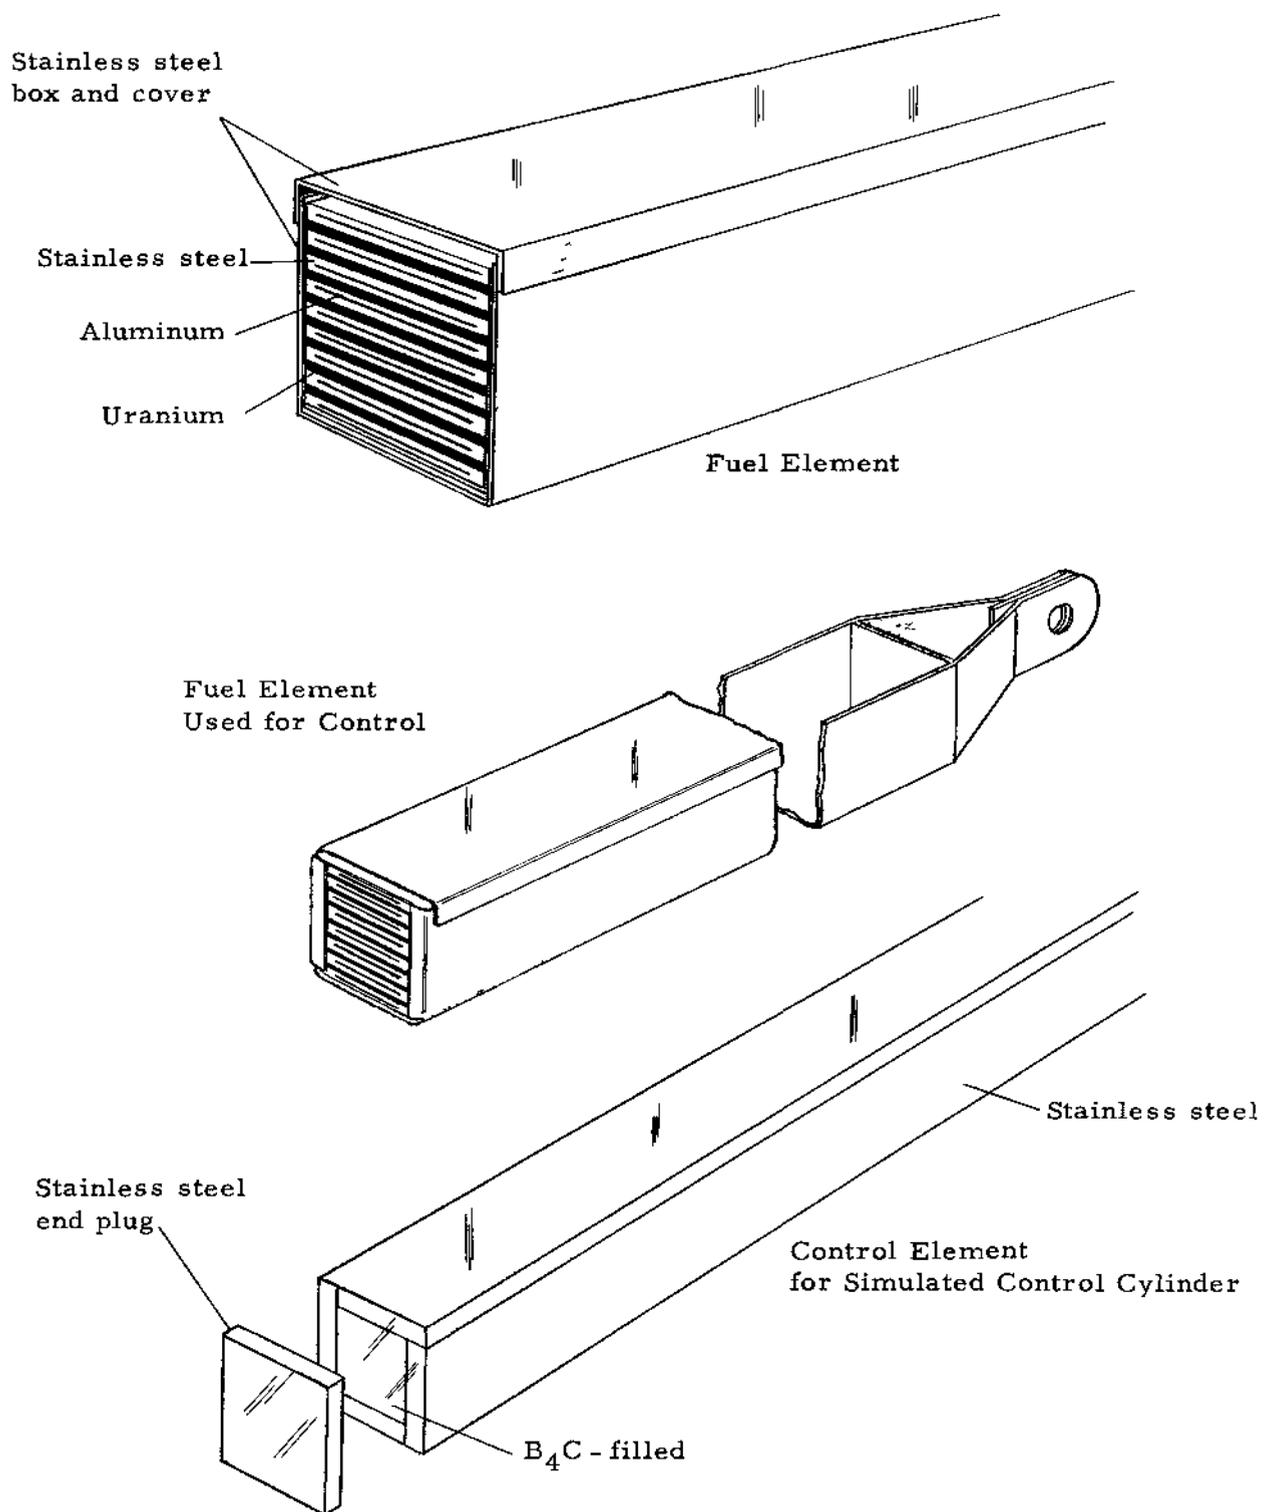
CRITICAL ASSEMBLY CORE ELEMENTS
